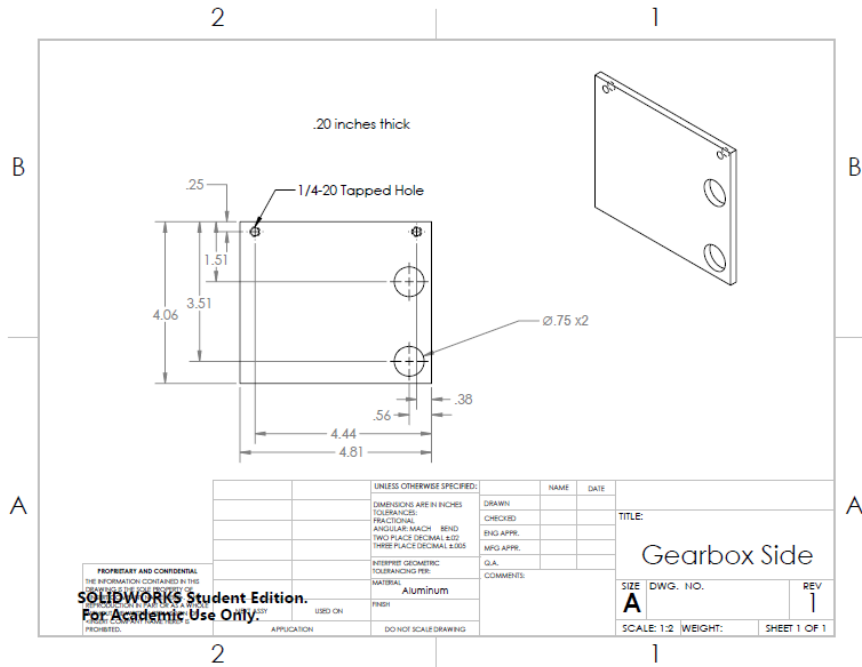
Gearbox Side Drawing. Revised: See Appendix E.3
